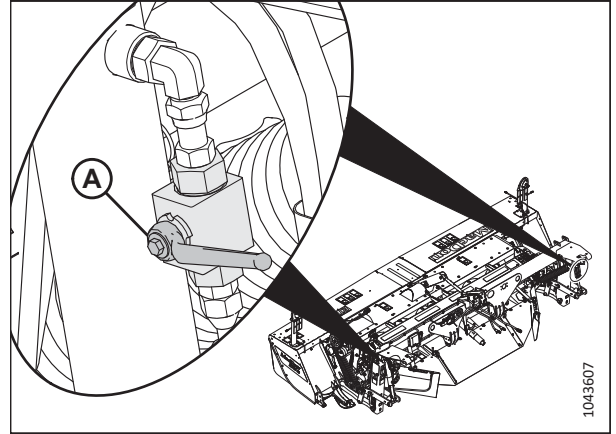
Cylinder Lock-Out Valve – Closed Position
